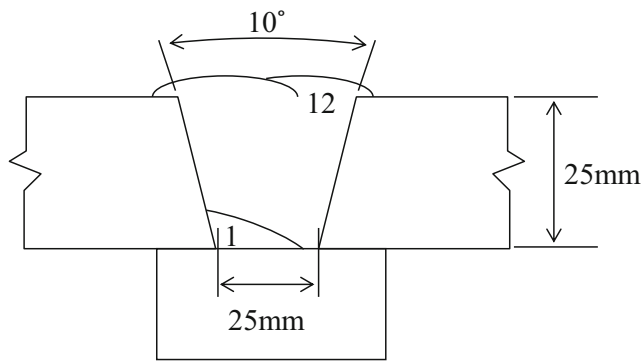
Welding groove configuration and pass sequences for SAW
